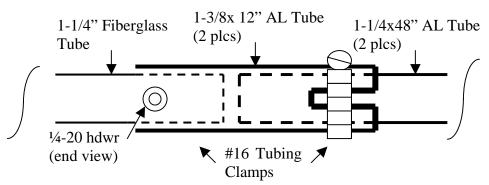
48" Radiator Tube to Center Insulator Assembly
